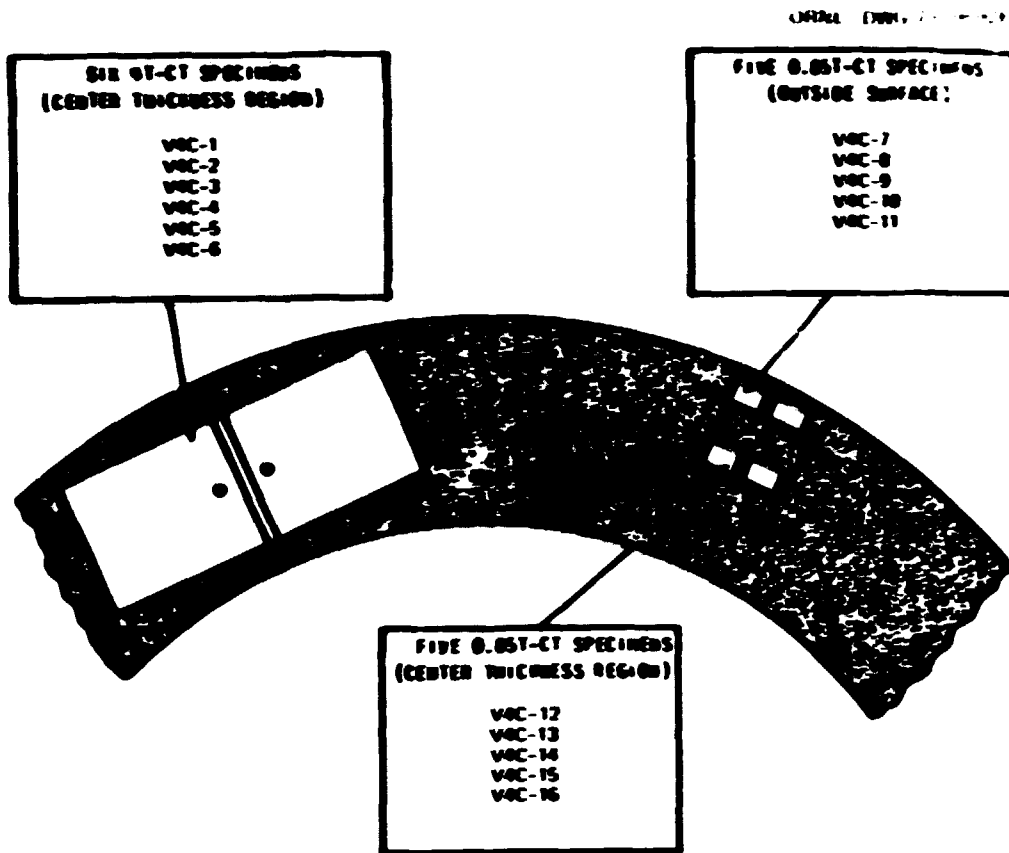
Machining of fracture toughness specimens from 0.05T intermediate pressure vessel V-4 base metal.
